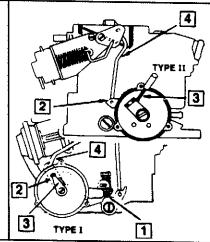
INTERMEDIATE CHOKE ROD ADJUSTMENT
